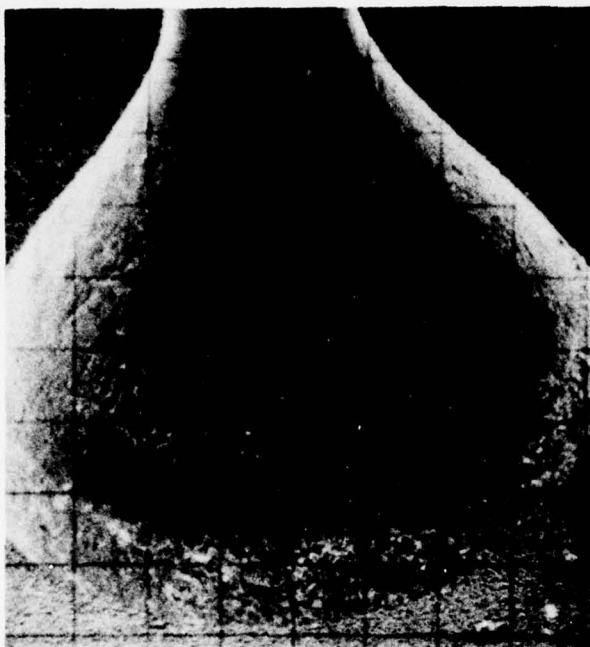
X50. Typical Sn63 Solder Joint in the As Soldered Condition
